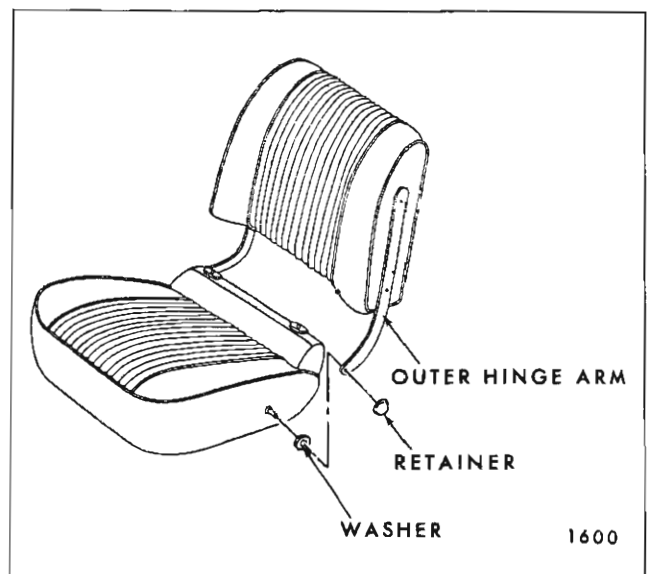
H19—Bucket Seat Back Removal - "A" Styles
